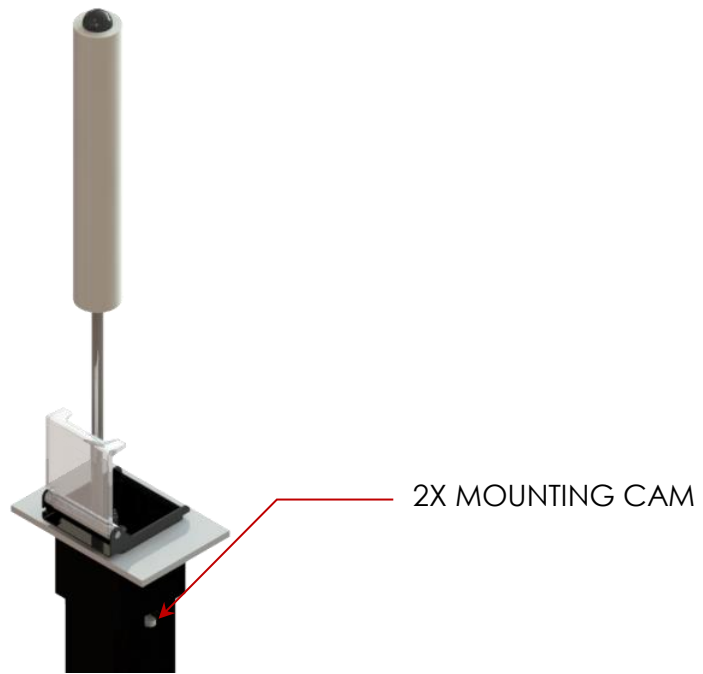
Mounting Cam in Locked Position (shown without pushbutton for clarity)
